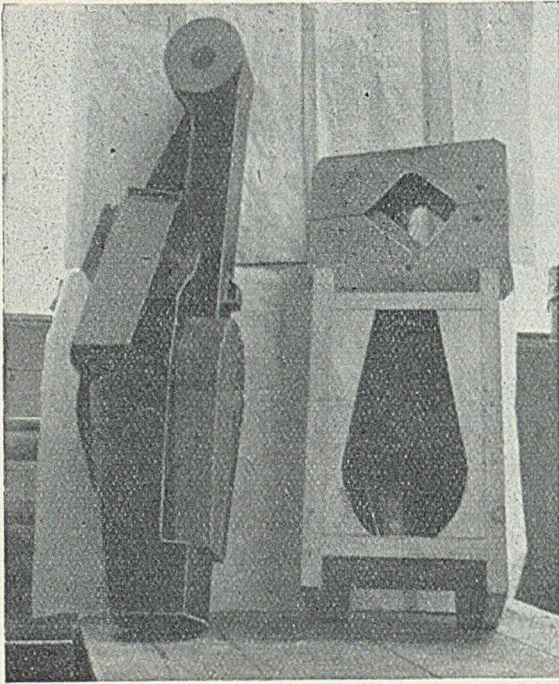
PATTERN EQUIPMENT FOR A CAST STEEL FINGER.
